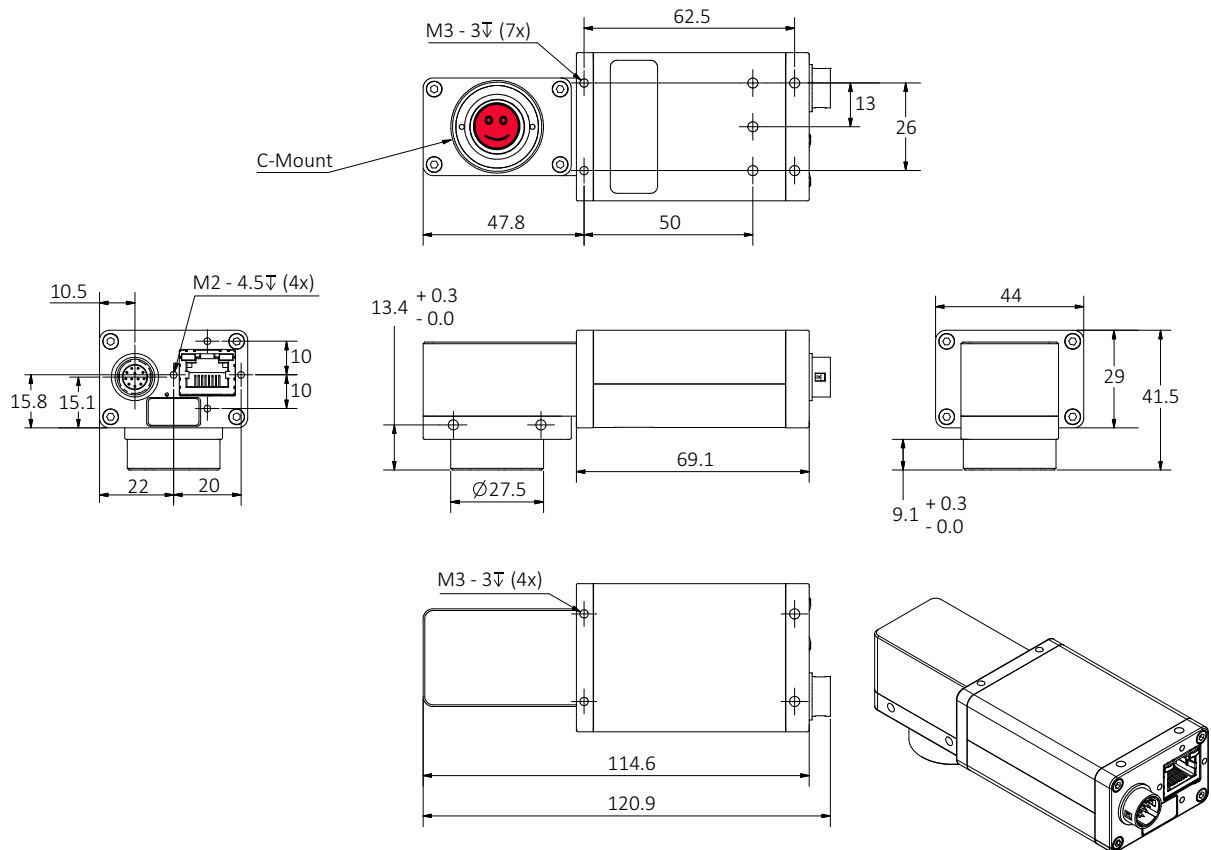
Manta type A W270 S90 housing dimensions (including connectors)
